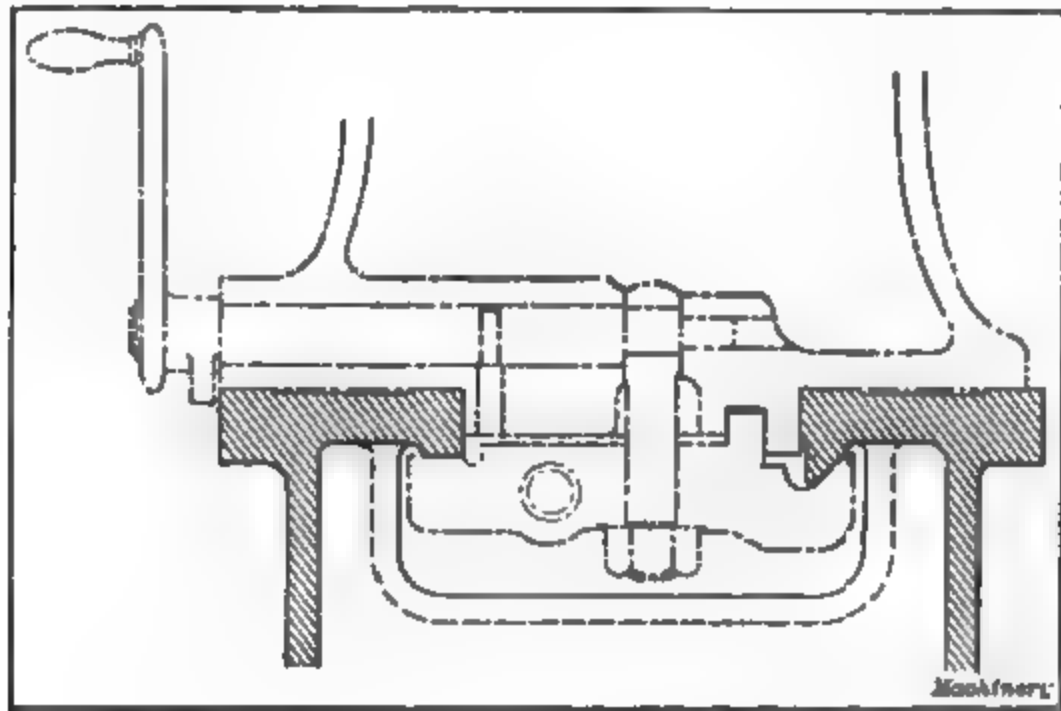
Inverted Vee Lathe Bed for Clamping Turret Base, made by De Fries & Co., Düsseldorf, Germany
